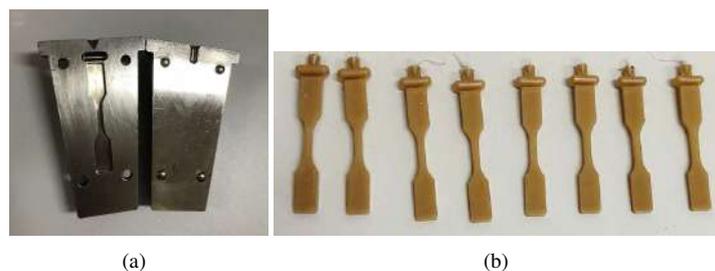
Mold (a) and tensile test specimens of type V (b) used in this work.
